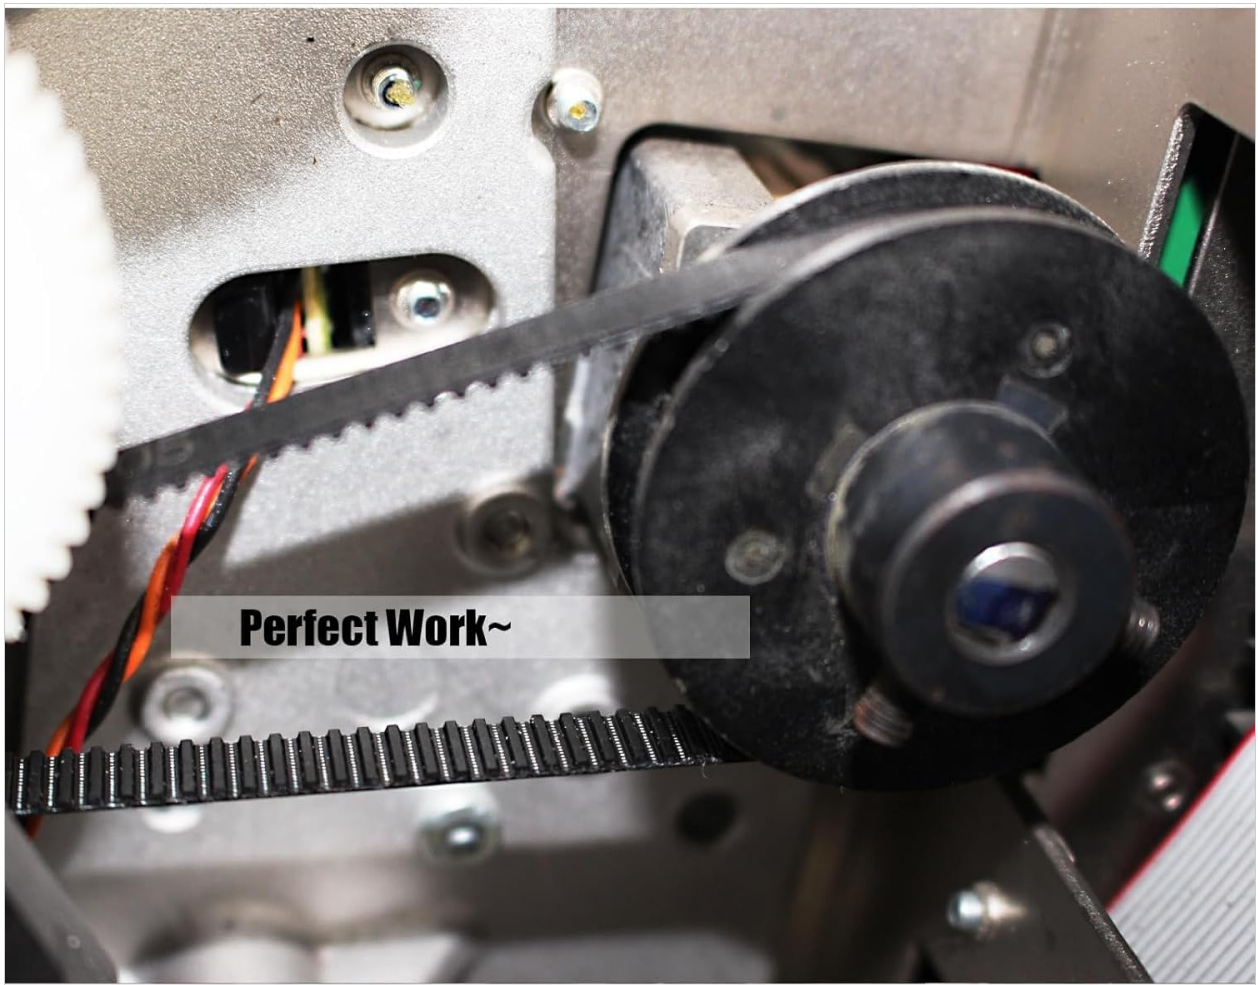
The new drive belt correctly installed on the printer's pulleys, indicating proper tension and alignment for operation.
